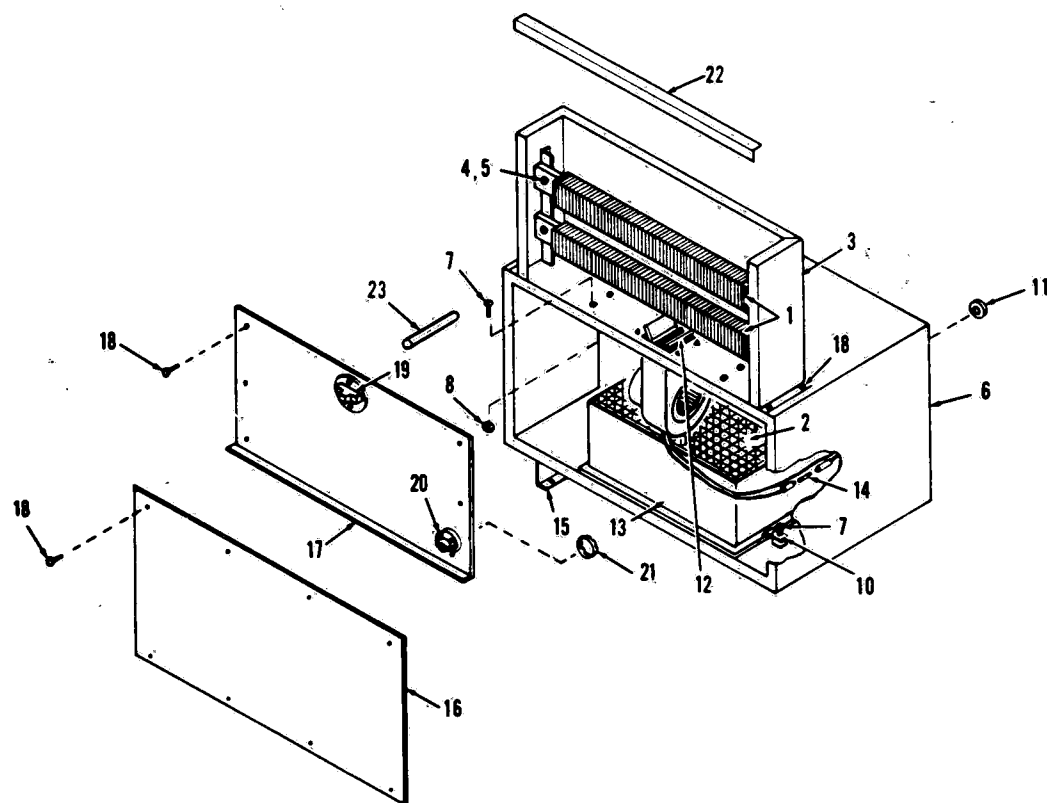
HEATER, FAN AND FILTER ASSEMBLY, Small Aerator
